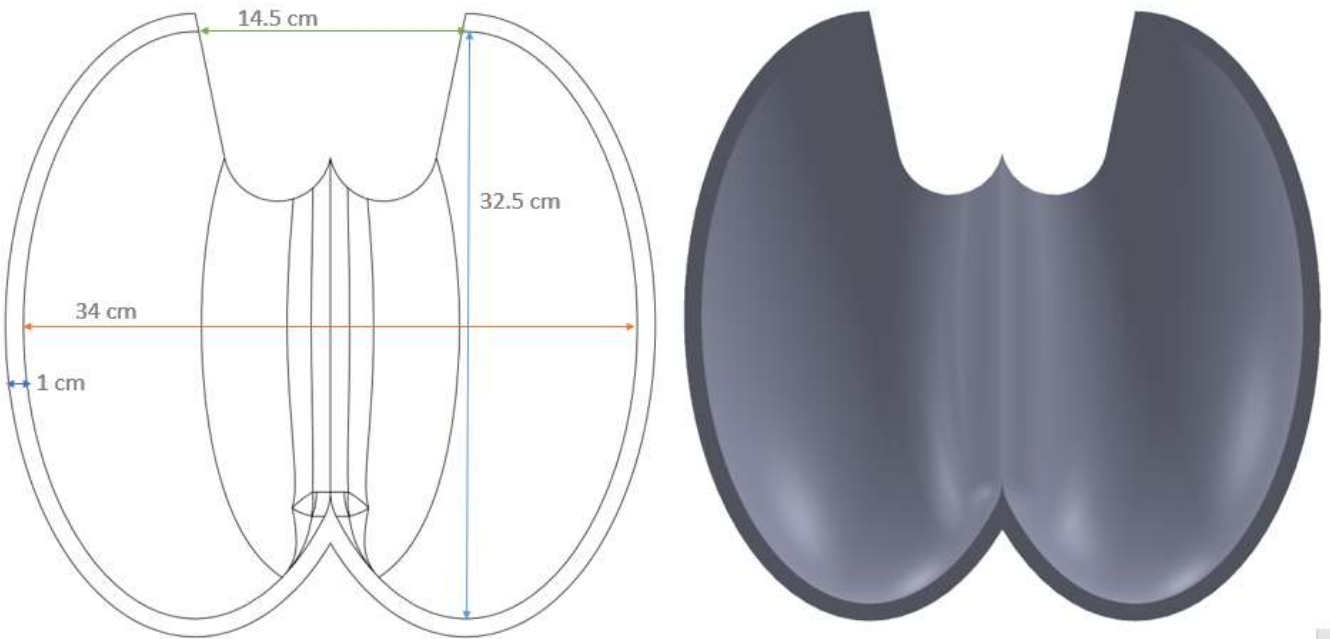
Pelton bucket front view drawing (left) and rendered (right).
